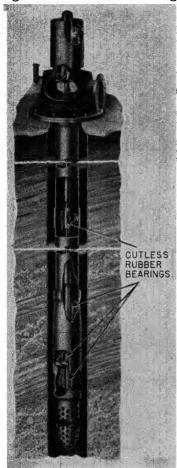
Cutless rubber bearings are standard equipment in many deep-well pumps and are used both on the upper line shaft and in the bowls, as shown.
